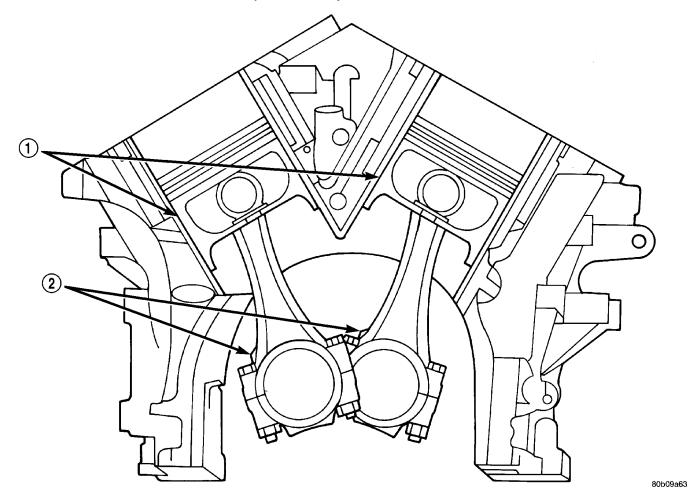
Piston and Connecting Rod Positioning (Front View of Engine)
